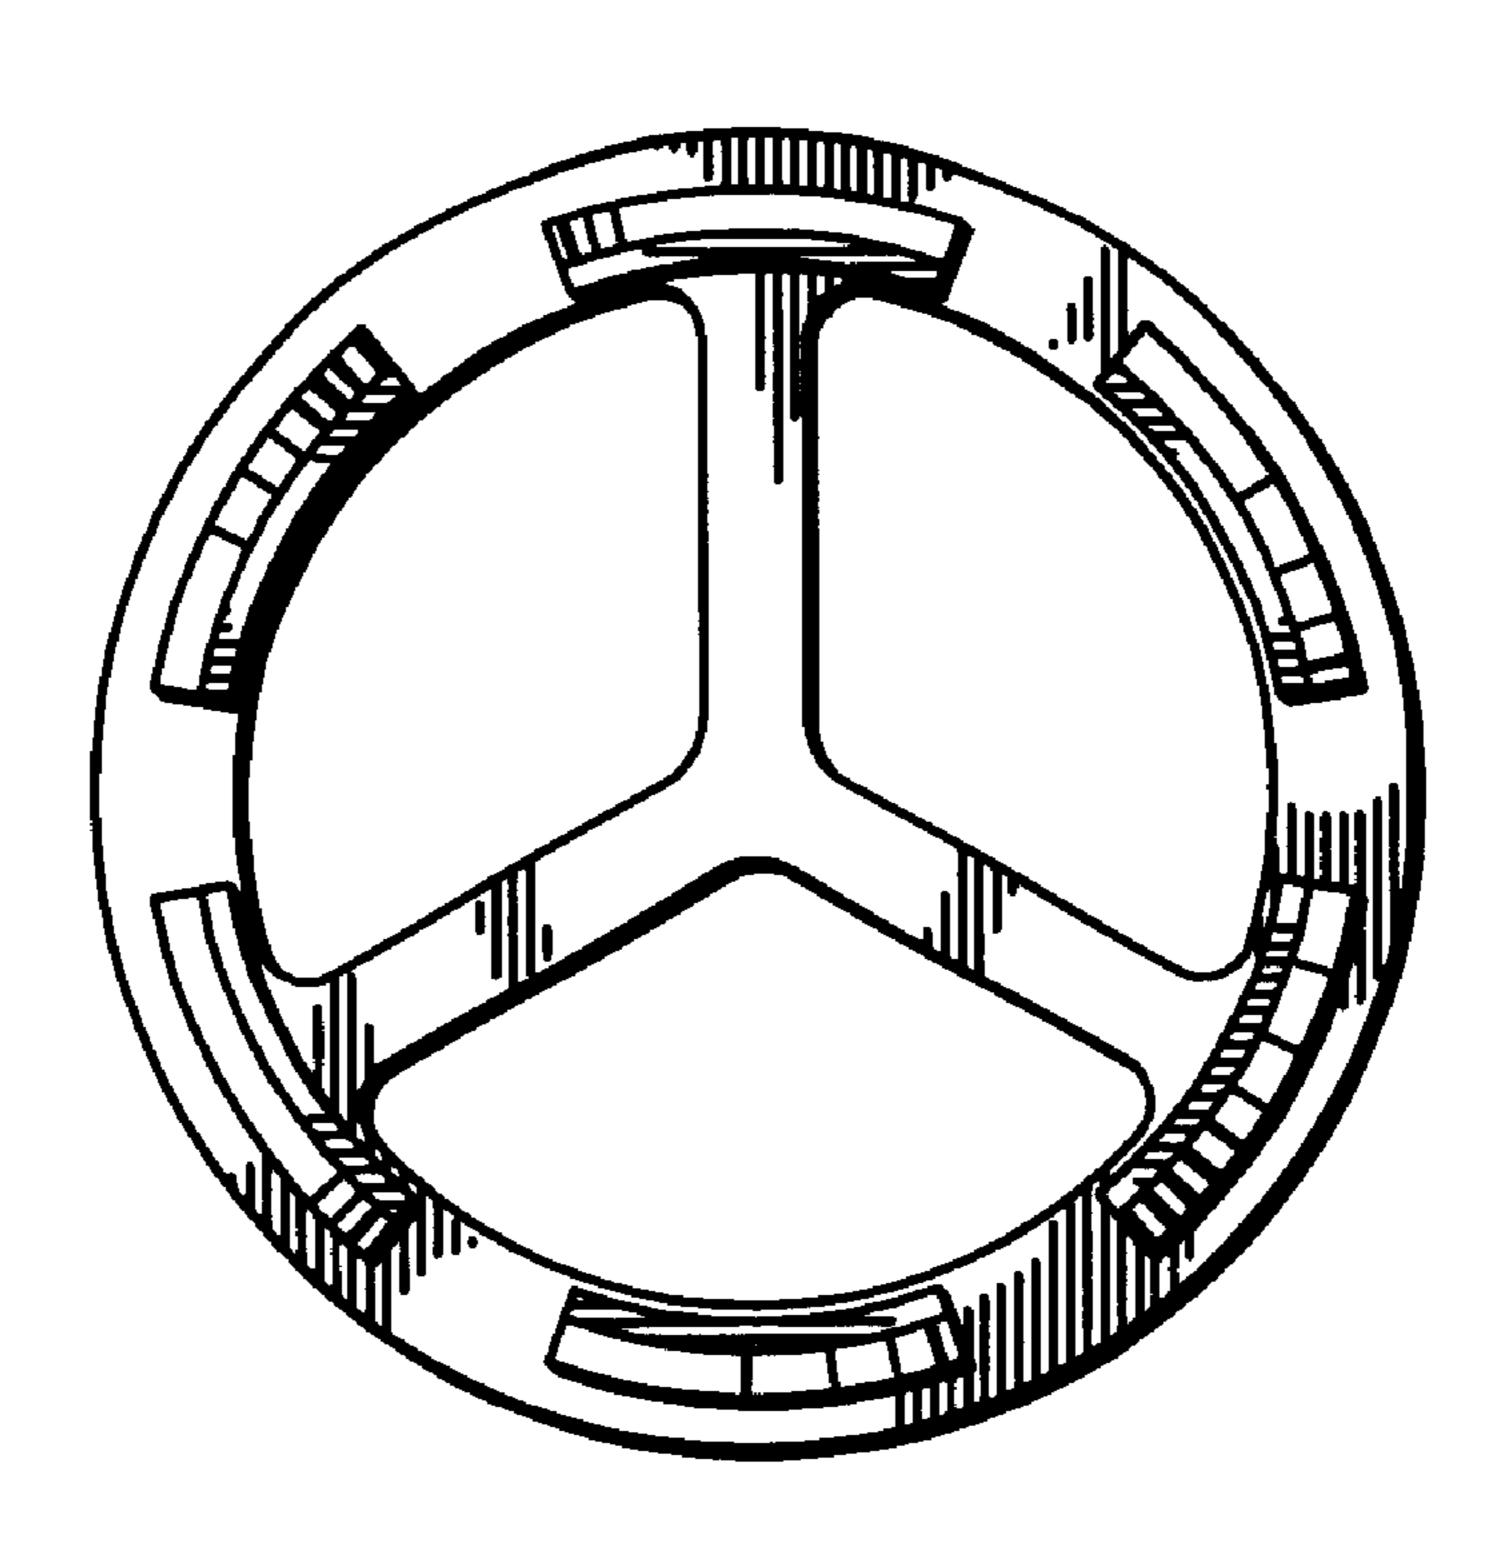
is a side elevational view of the end cap of FIG. 5; FIG. 7 is an interior end view of an alternative embodiment of an end cap for a spinal implant;
